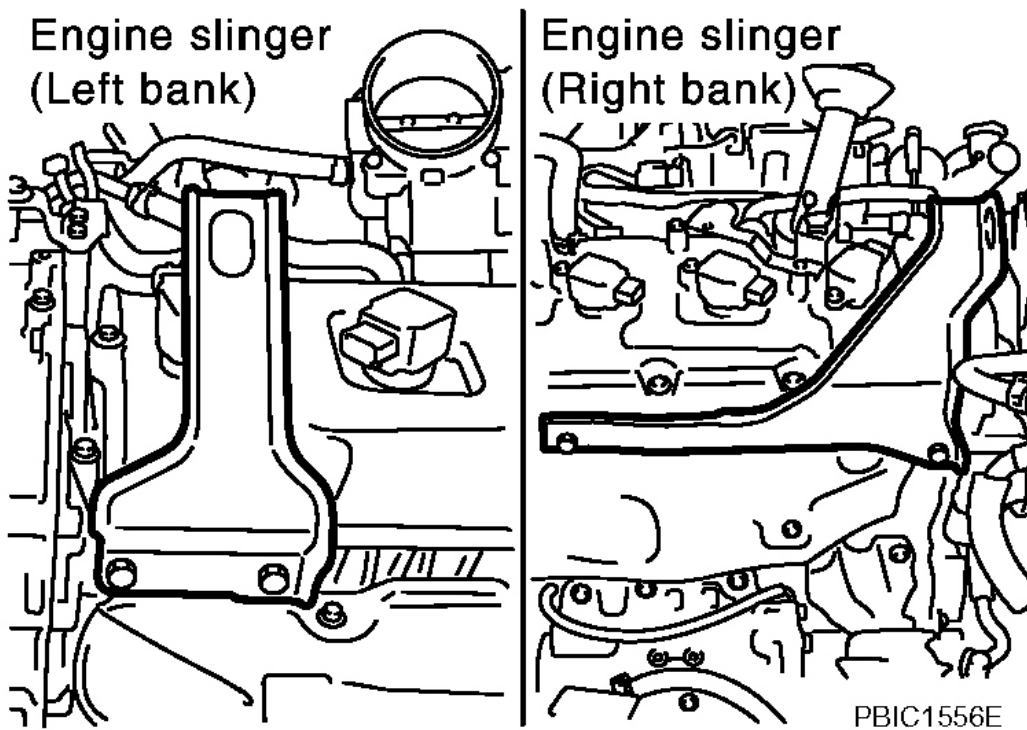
Identifying Engine Slingers Into Front Of Cylinder Head (Left Bank) And Front Of Cylinder Head (Right Bank)
